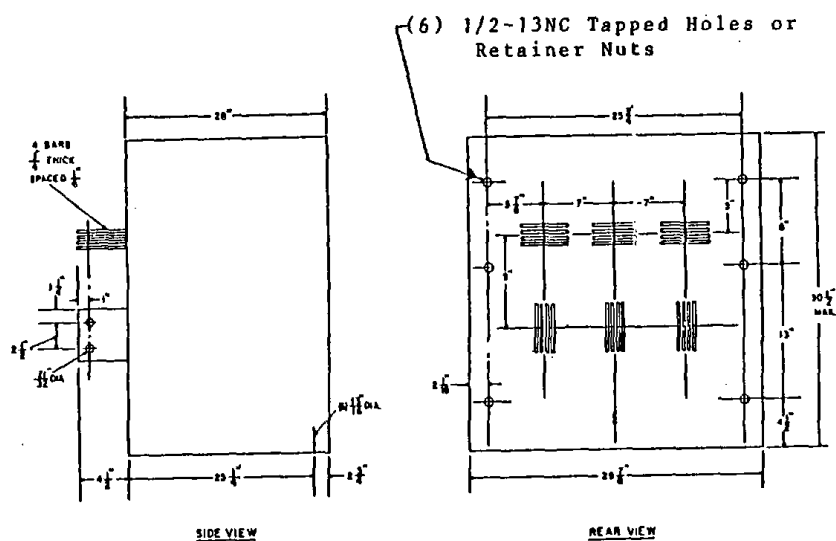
Outline and mounting dimensions for circuit breaker type ACB-2501R.
